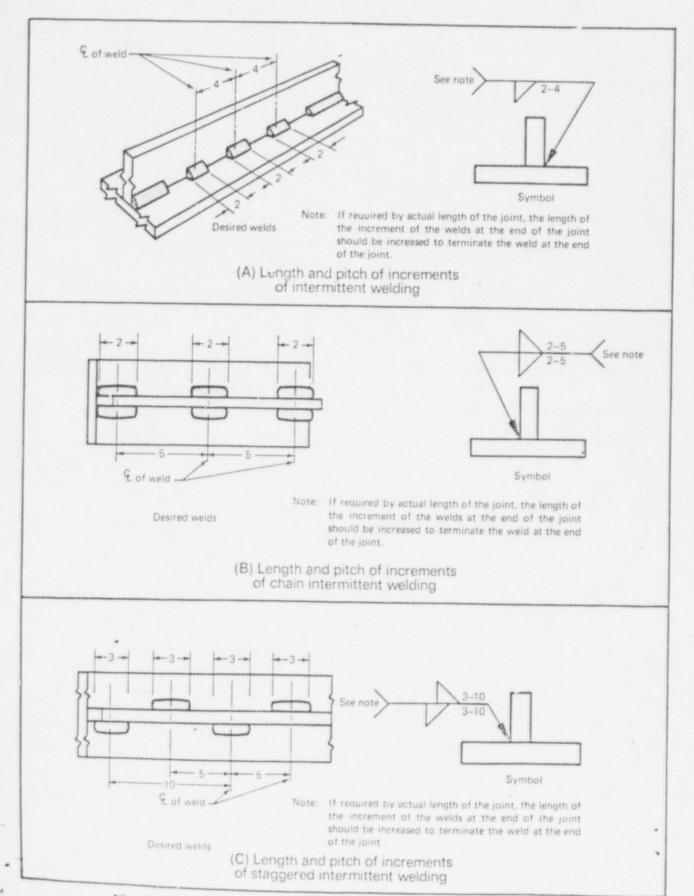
Application of dimensions to intermittent fillet weld symbols
